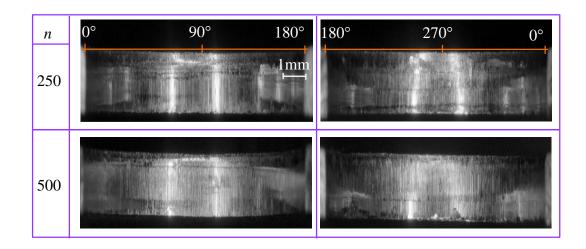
Surface of sheared edges of die-quenched steel sheets for repeated punching with automatic centring using punch with lubricant.
